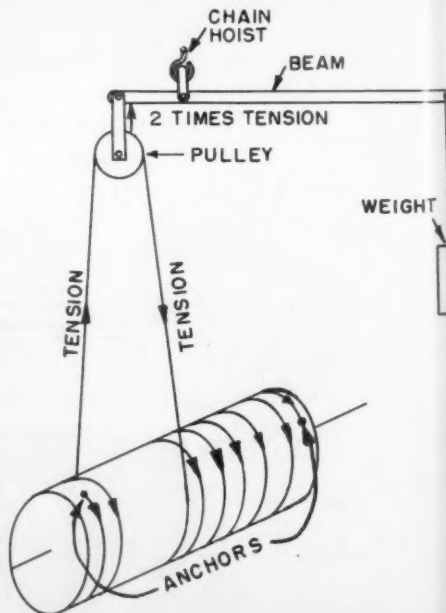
Less expensive than device shown above, this method can be used for binding.
